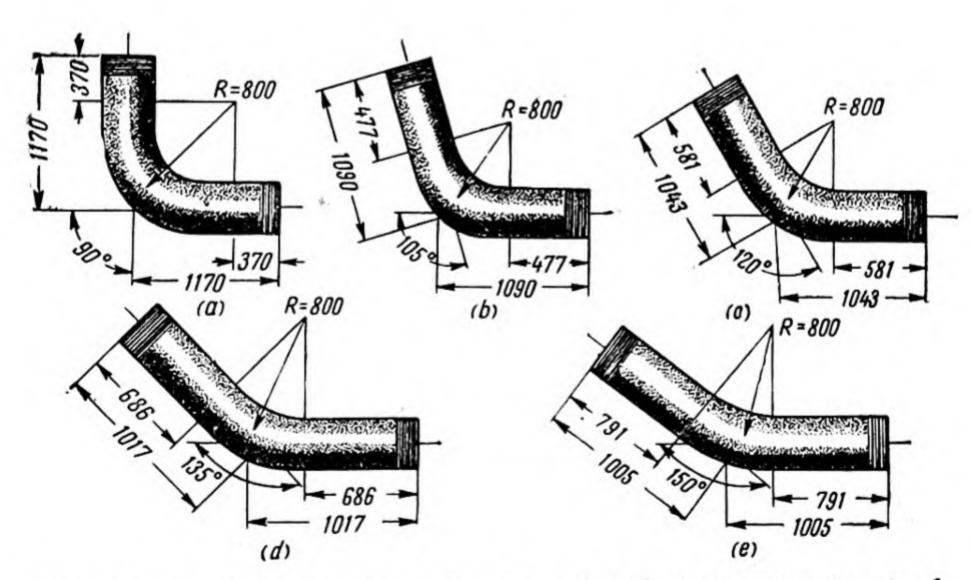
Standard bent elbows for pipes of 1" to 3" diameter, length of blanks up to 2,350 mm:
